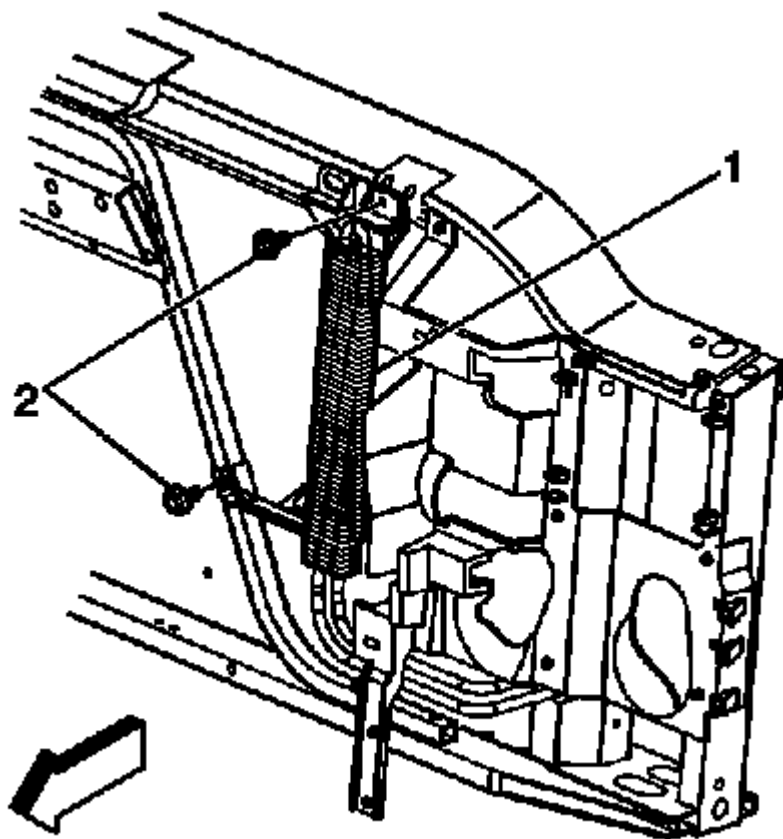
Removing Power Steering Cooler From The Vehicle (Without Hydroboost)
